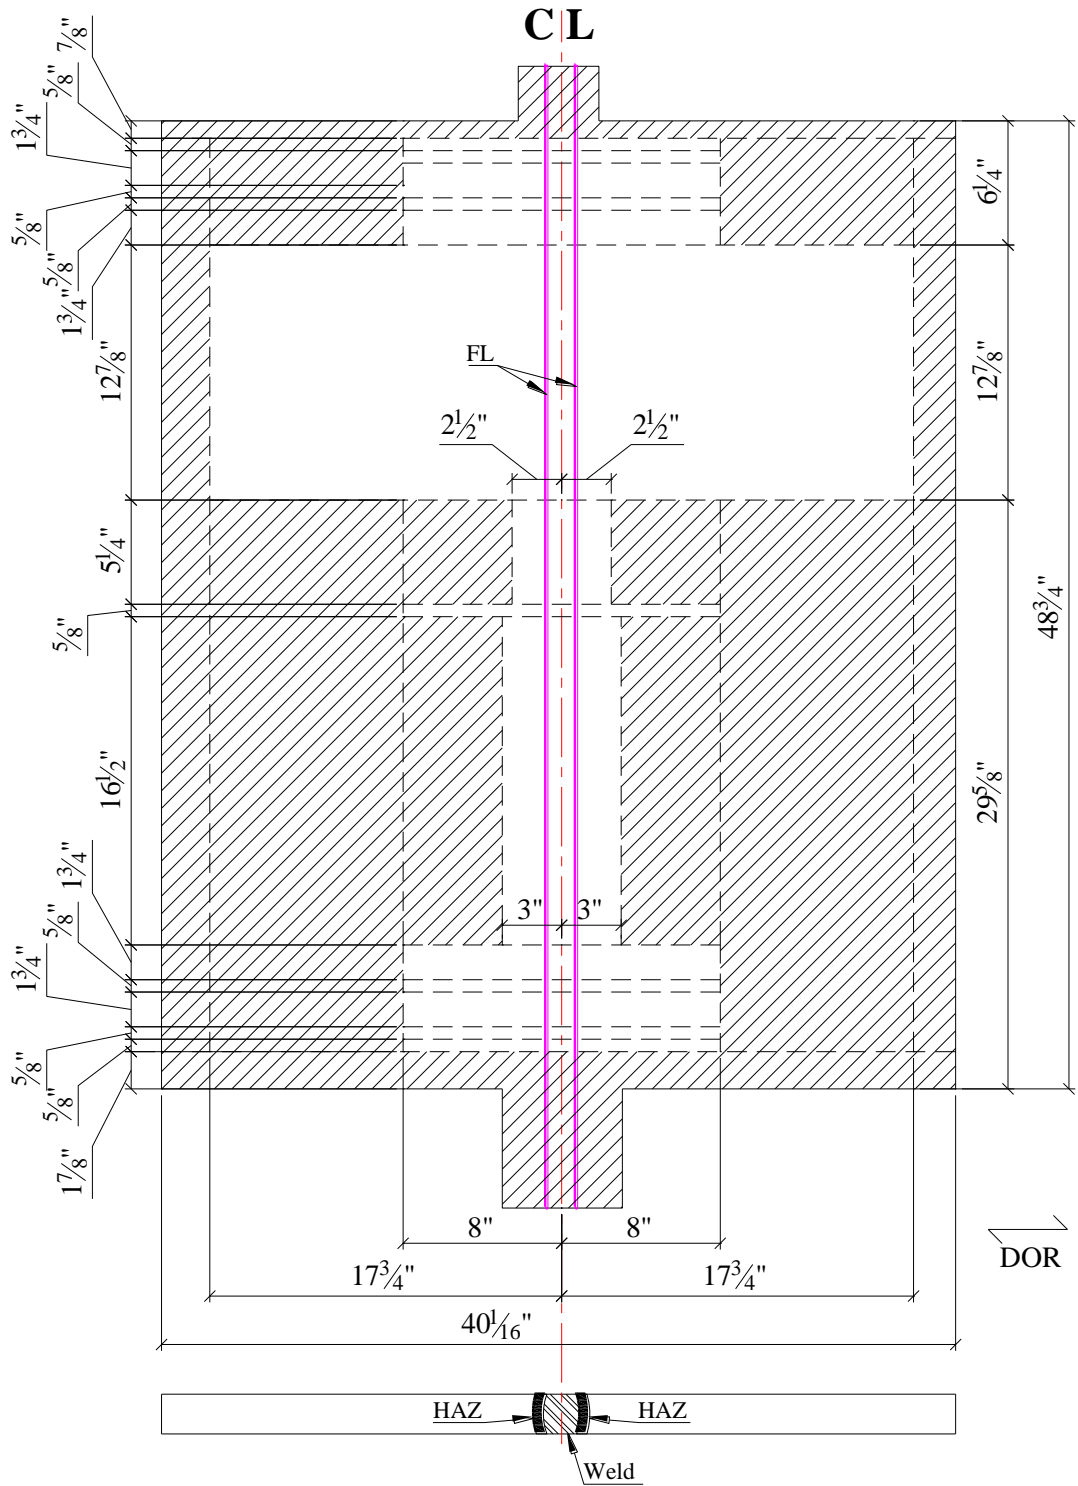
Plate A sectioning plan and specimen lay-out
